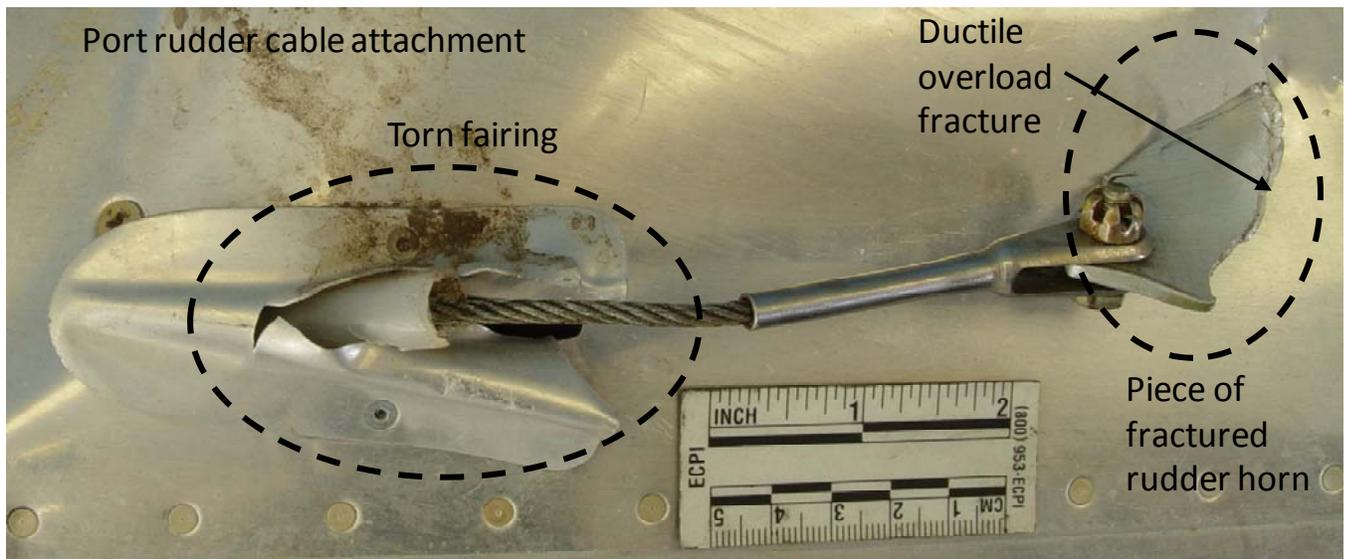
Macrograph showing a fractured piece of the port side rudder horn and torn fairing.
